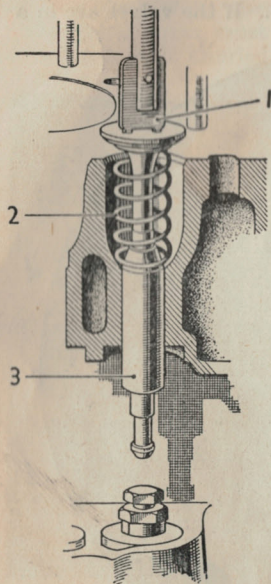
ON LATER ENGINES A PEGGED TOOL (1) IS USED TO ROTATE THE VALVE. THE LIGHT SPRING (2) AND THE VALVE GUIDE (3) ARE ALSO SHOWN
